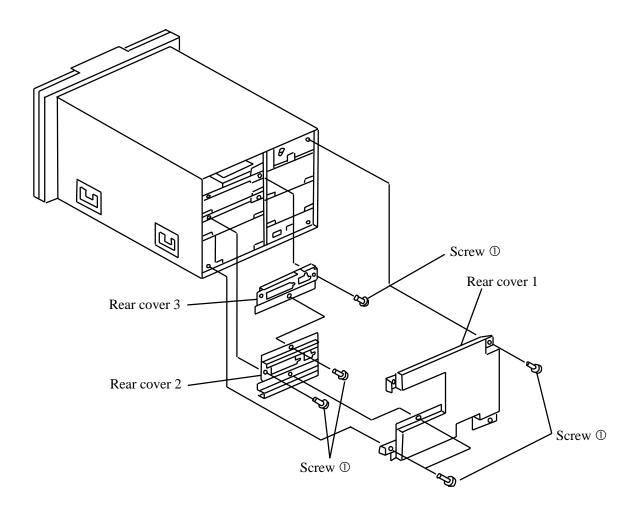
DF300-RKH Opening/Closing Rear Covers
